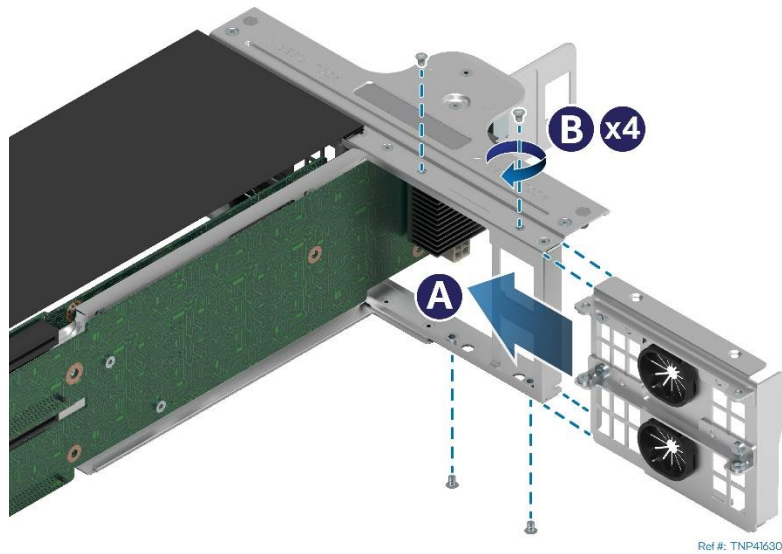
Accelerator Riser Assembly Rear Bracket Installation
